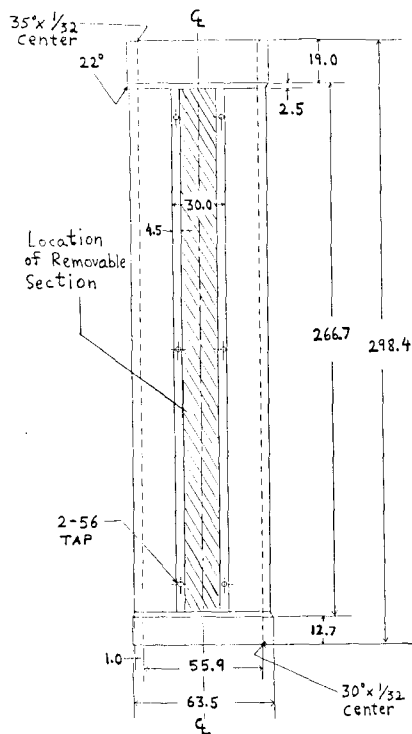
(a) The test cylinder without the removable section (dimensions in millimeters)
